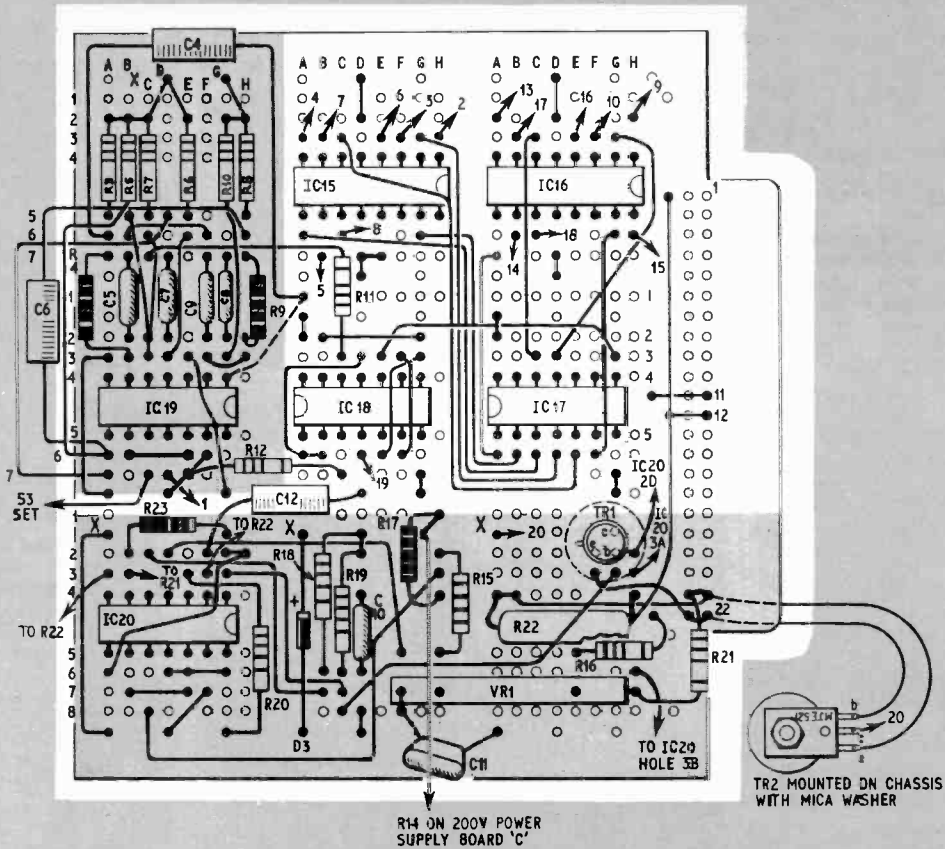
Layout and wiring of the complete Board "B" incorporating the alarm circuit and 5V regulator
